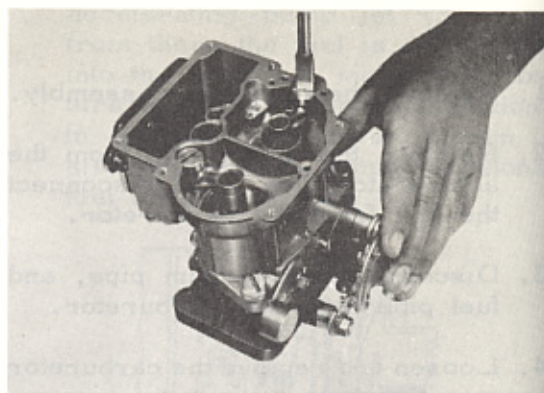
Primary Main Air Bleeder Removal V0574
